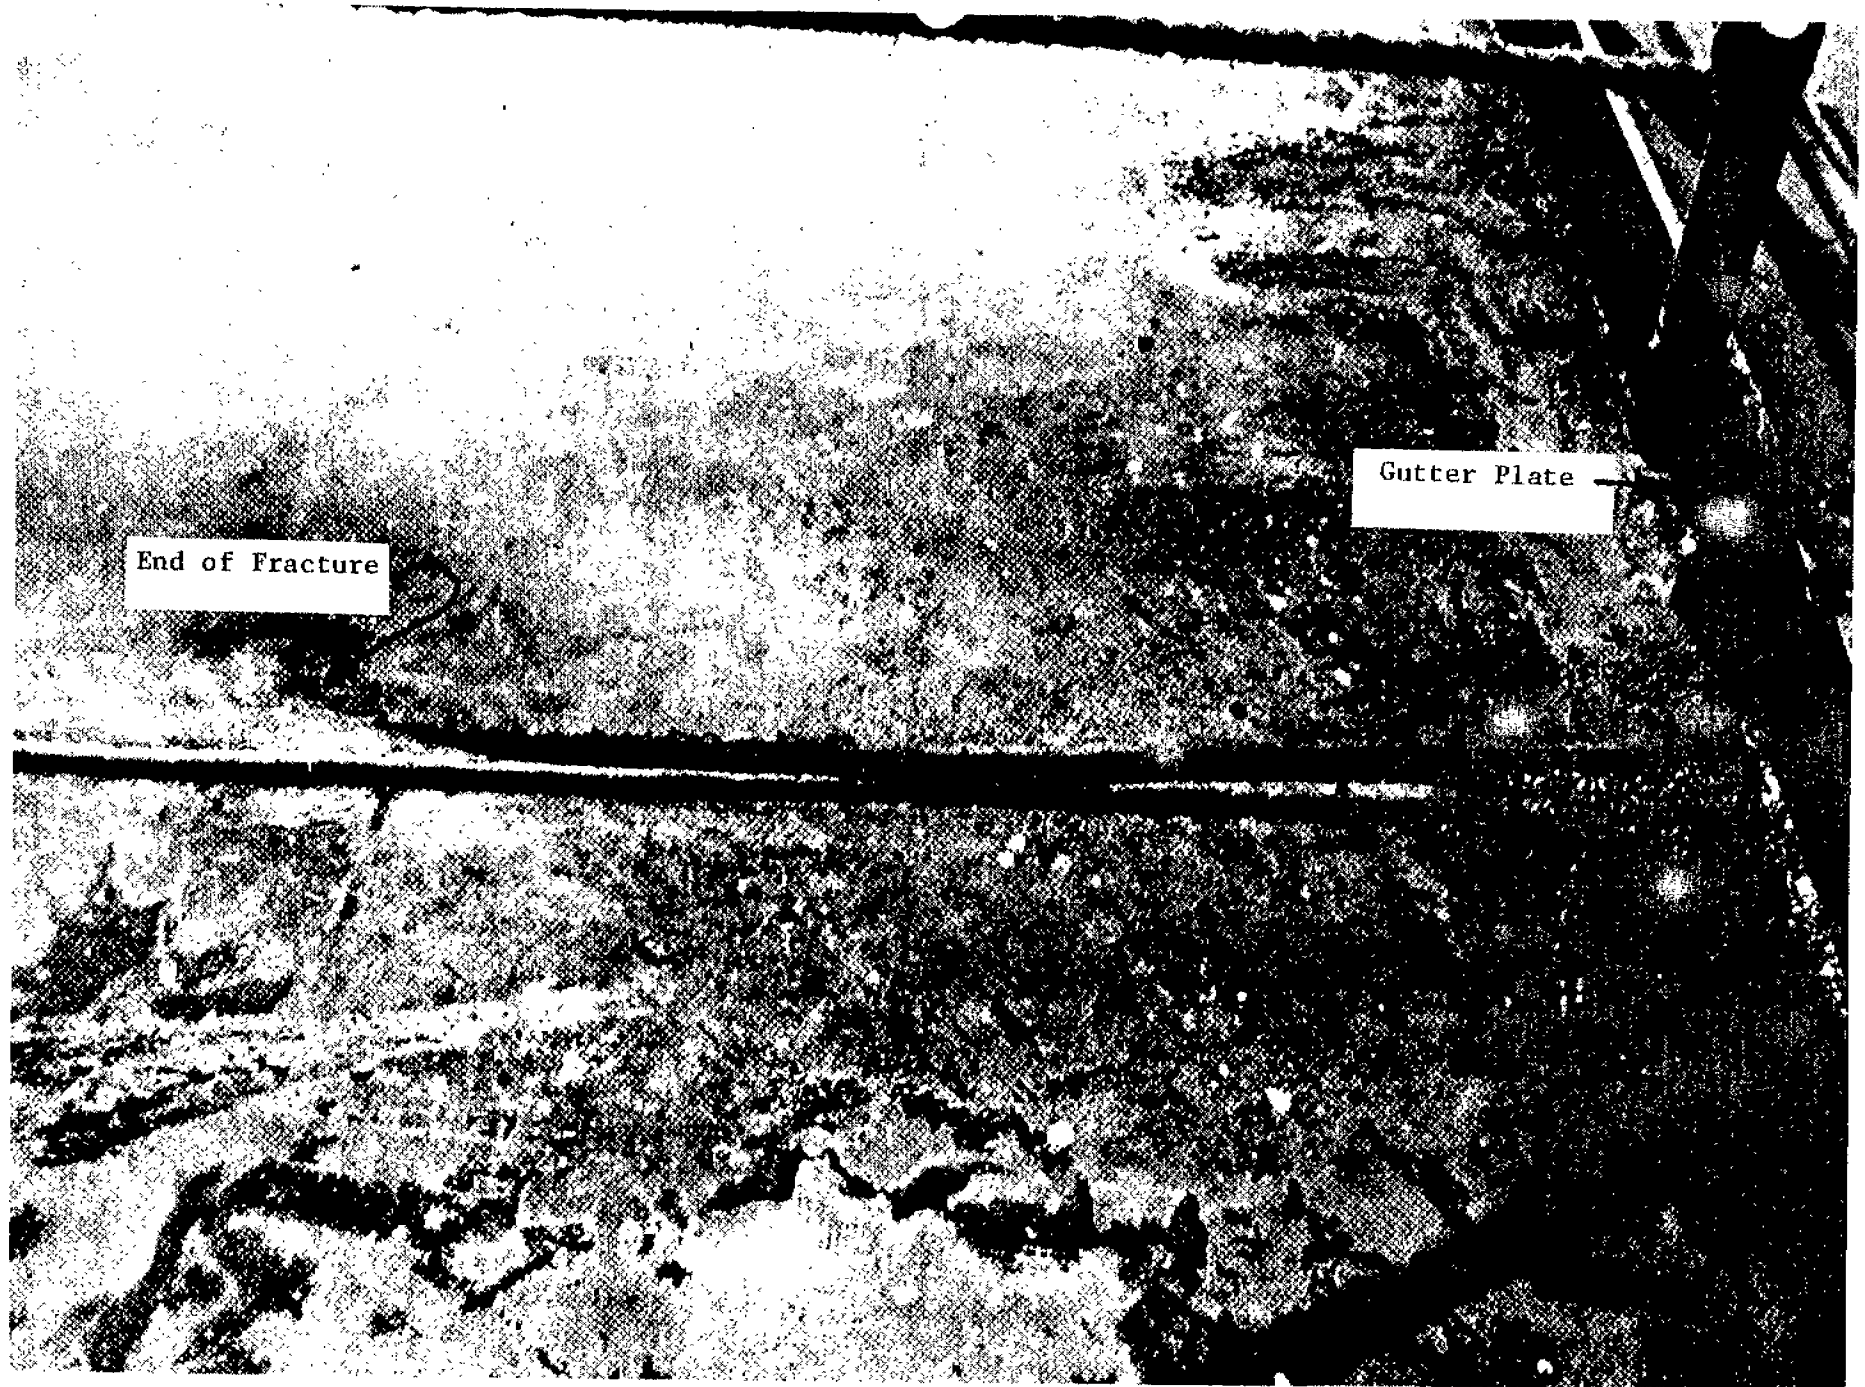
Fracture across the deck. Fracture was entirely in the plate with the fracture surface about 45° to the plate surface.
